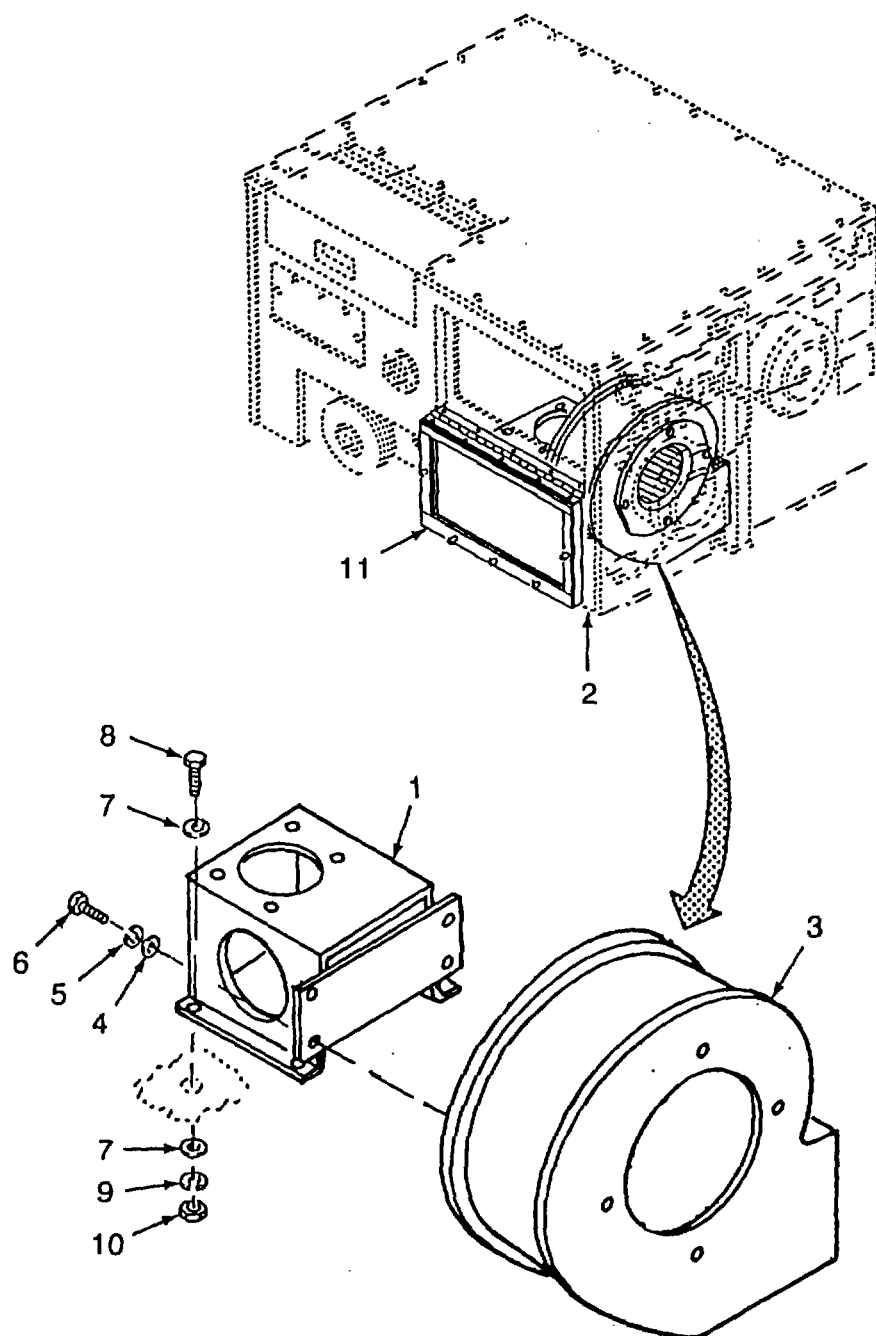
Circulating Air Fan/Pump Motor Assembly Installation
